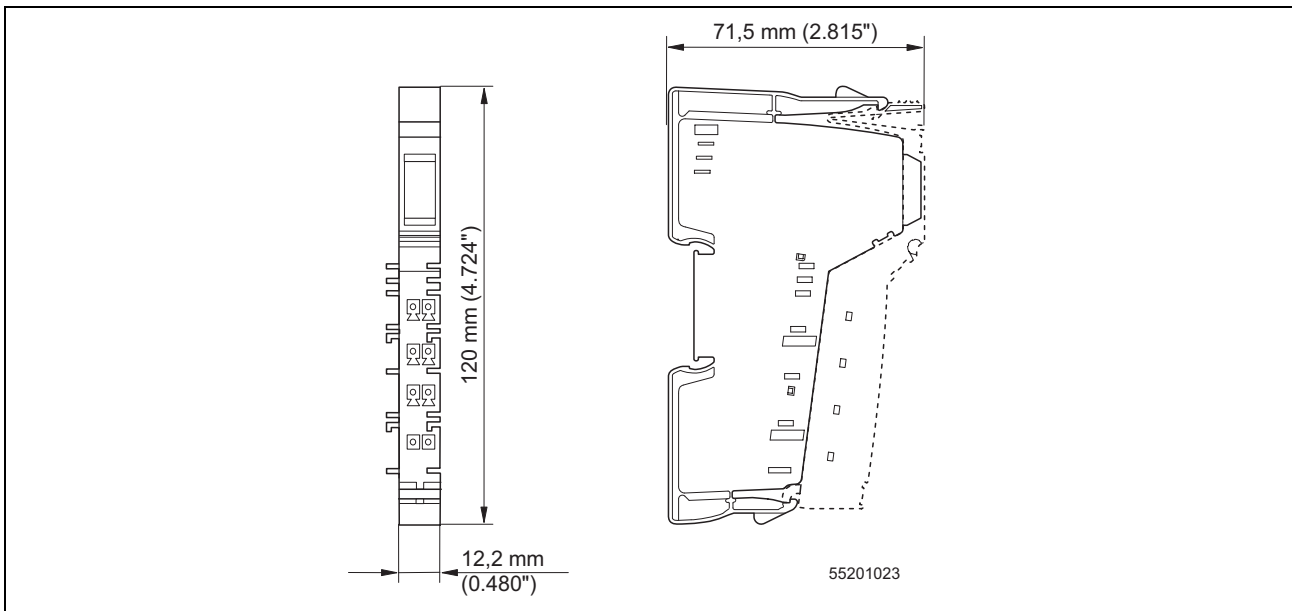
Dimensions of the electronic socket (2-slot housing)
